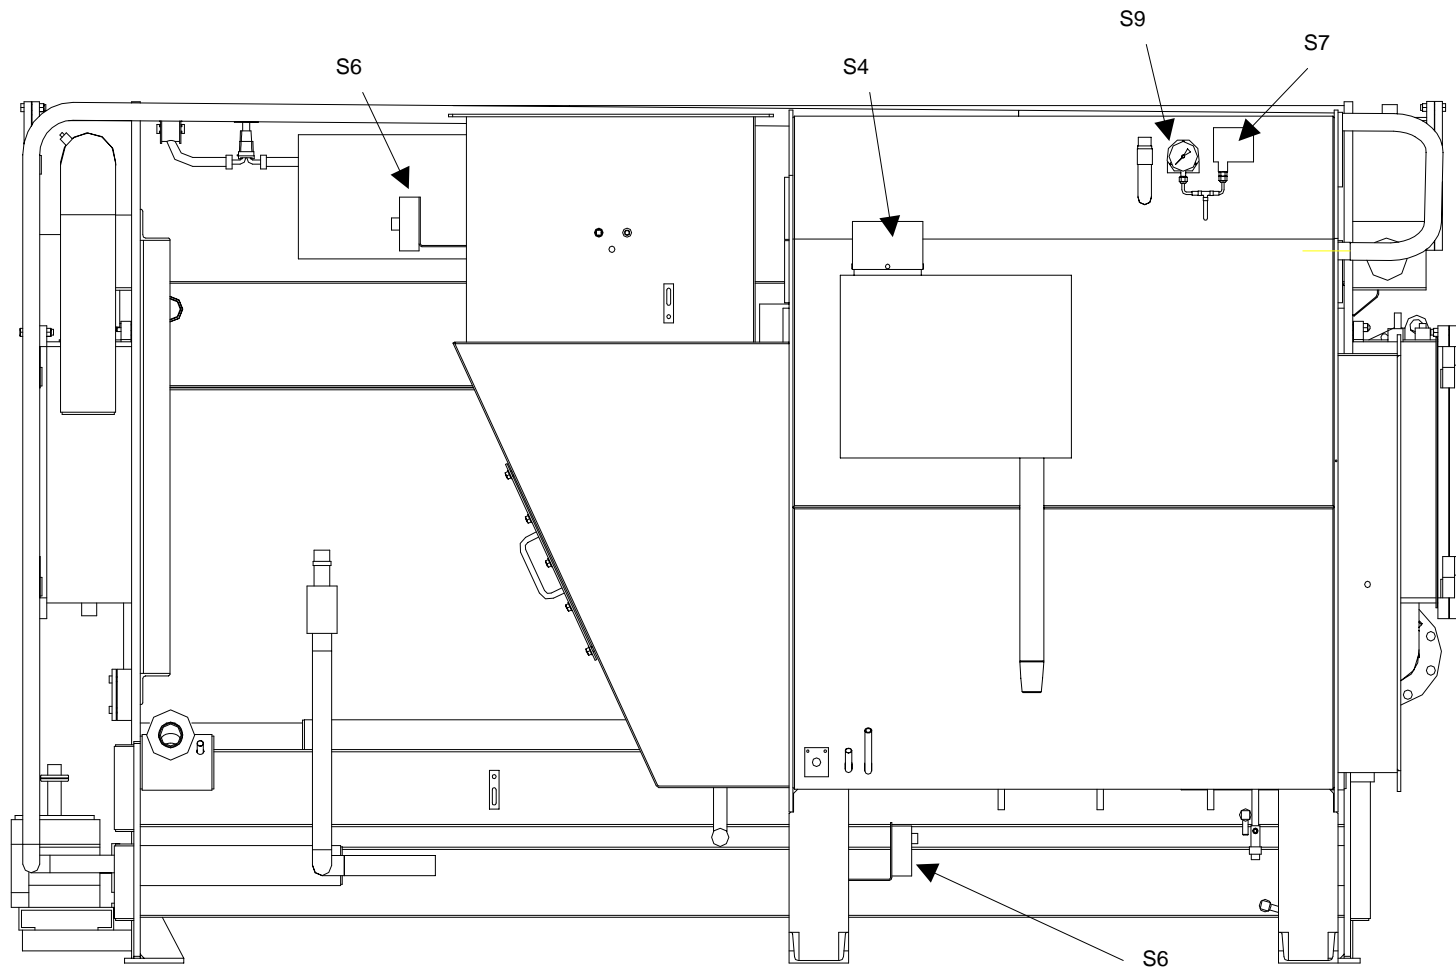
Switches Location, Side View (16DNP012 Smoke tube type chiller)
